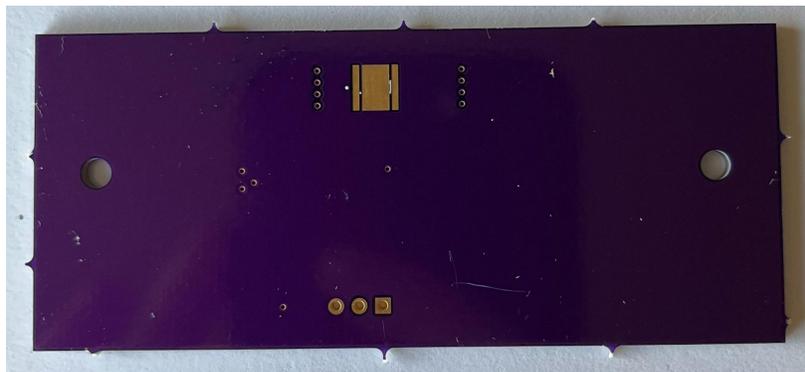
Strobe Light Board Back Unpopulated PCB
